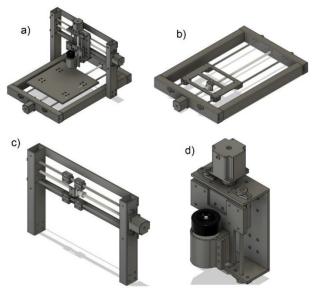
a*) CAD model of desktop CNC milling machine, b) CAD model of X axis, c) CAD model of Y axis, d) CAD model of Z axis
